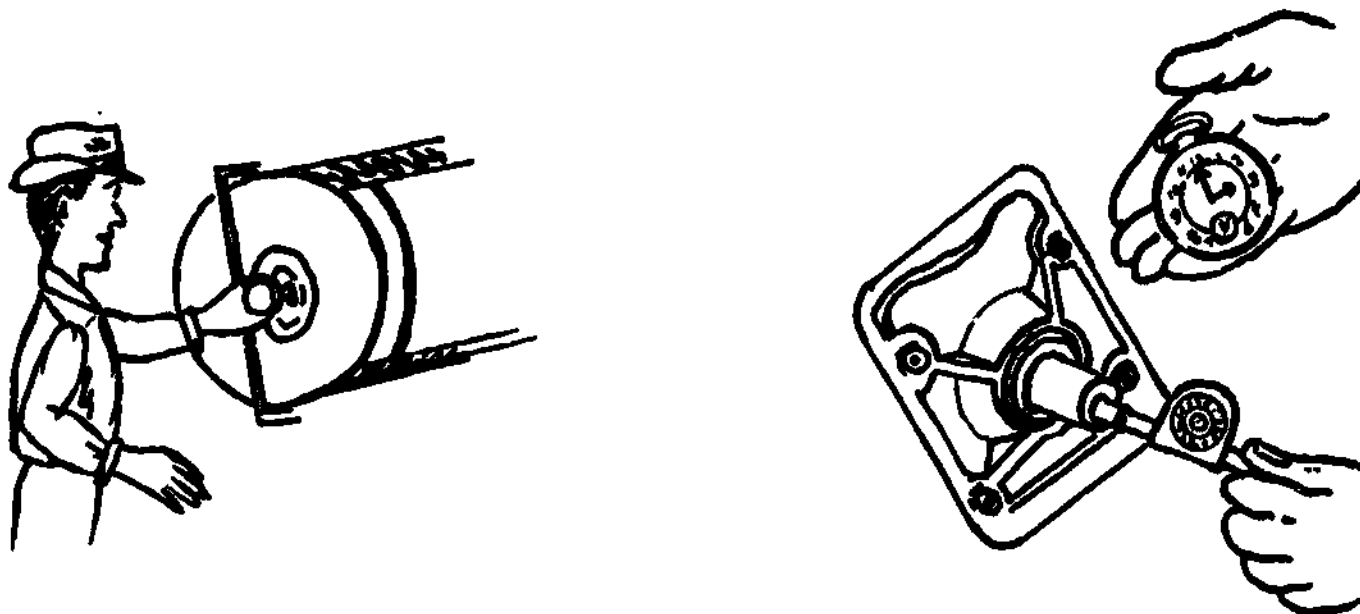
Check the machine speed by using a speed indicator on the "key" shaft.
